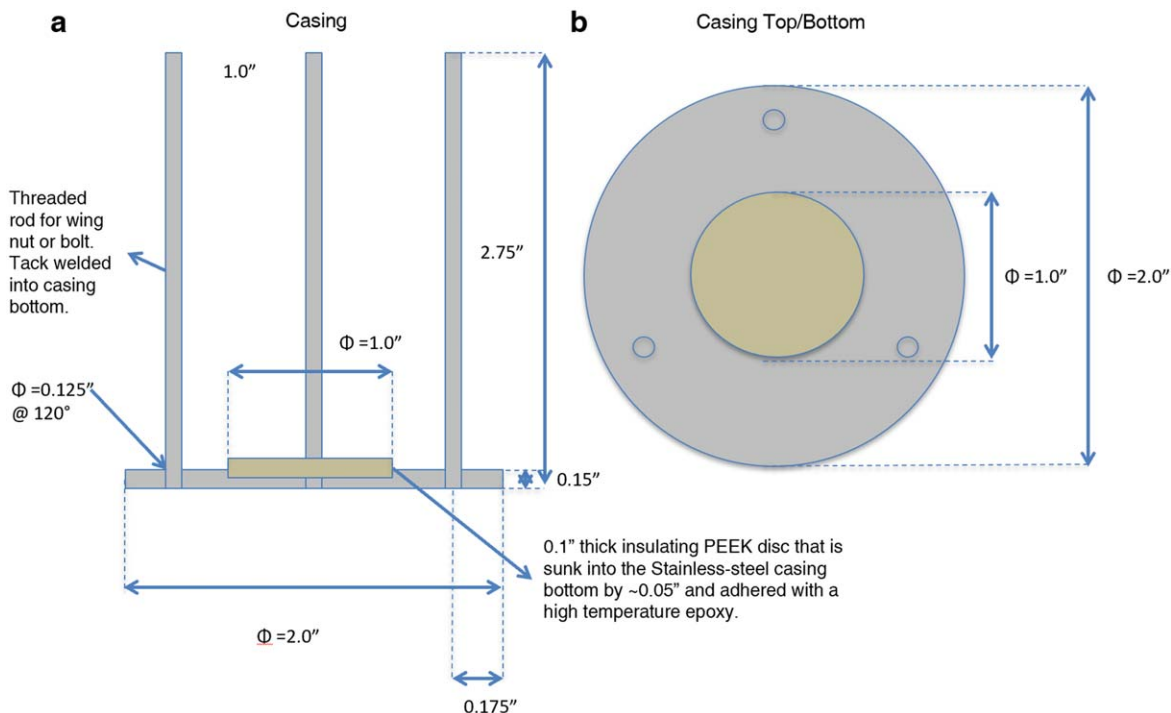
Dimensions for the casing for the split cell and load cell. (a) Side view of the casing rods and bottom; (b) Top view of the Top and Bottom of the casing.
